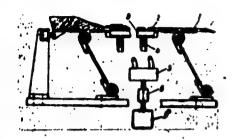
Vibratory vacuum conveyor for flat airtight parts
